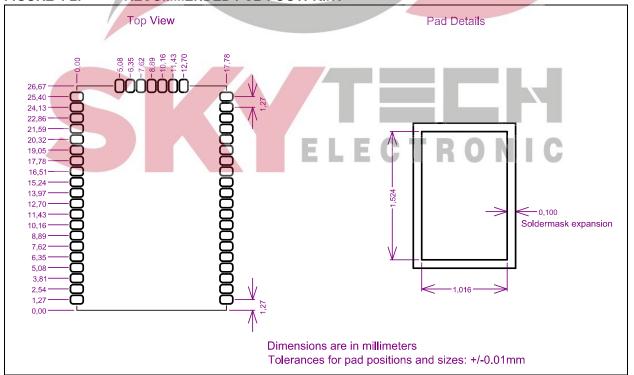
RECOMMENDED PCB FOOTPRINT
